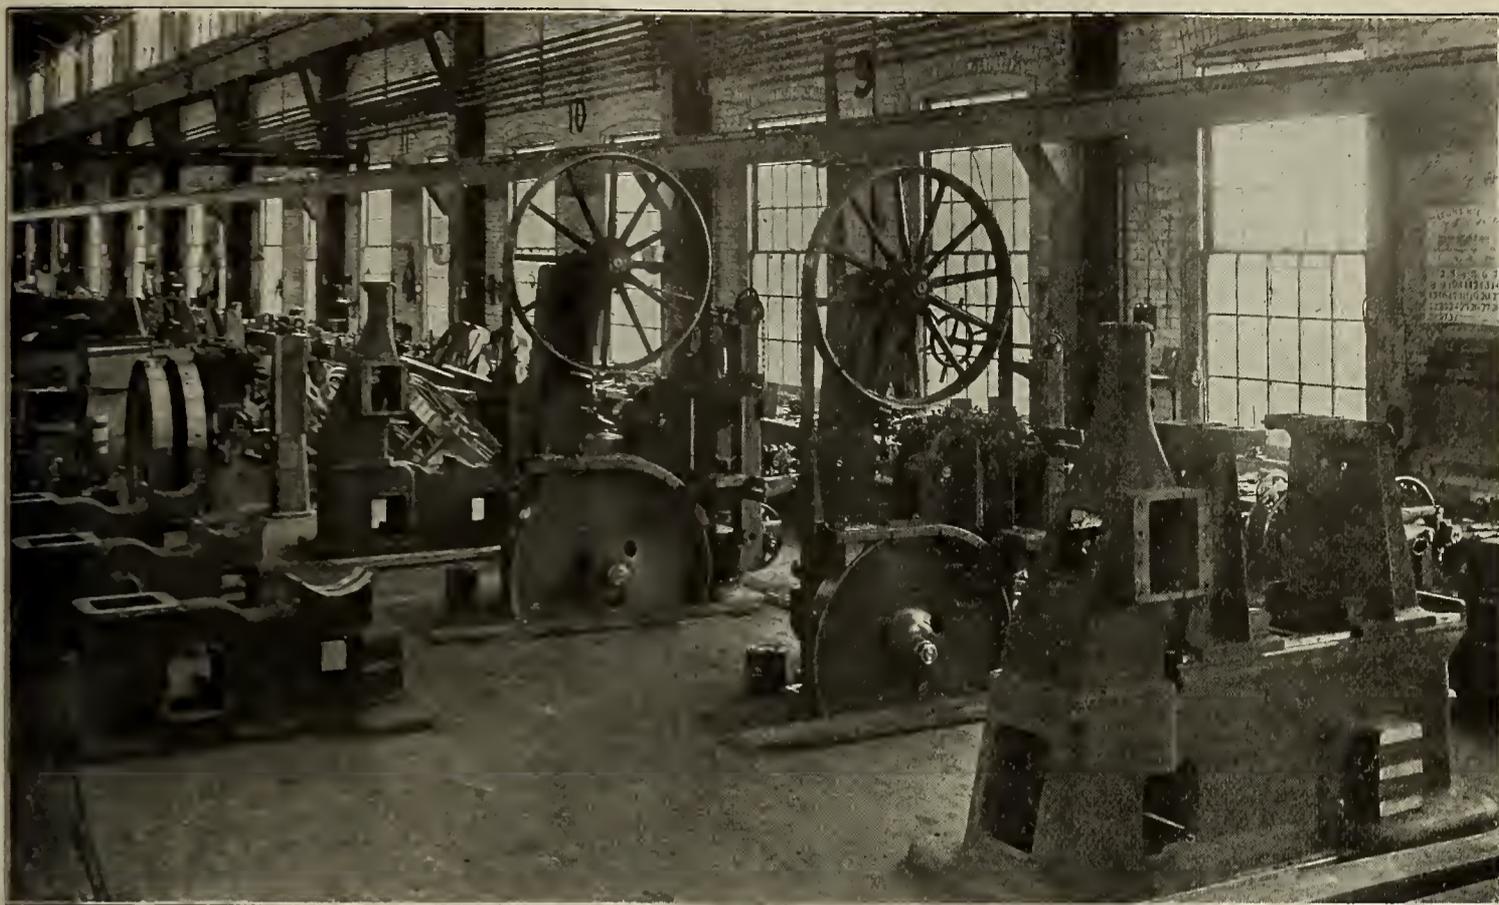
THE BAND RE-SAW ERECTING FLOOR.
